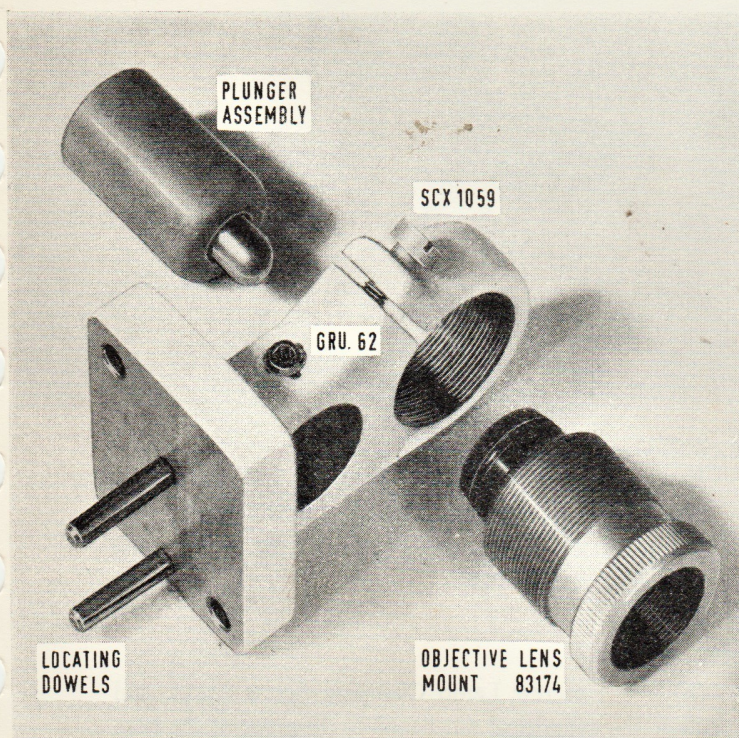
OBJECTIVE LENS AND PLUNGER ASSEMBLY, PART DISMANTLED, SHOWING LOCATING DOWELS ON BRACKET
